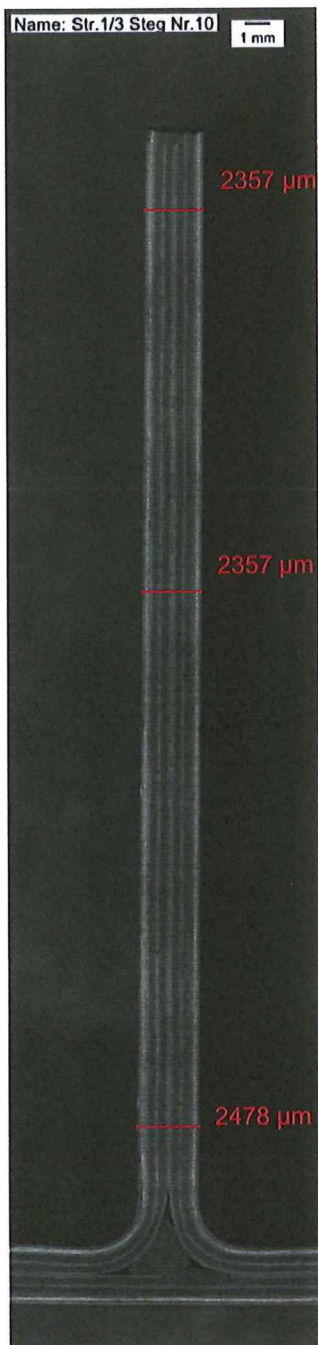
Cross section of panel 6 stringer 2b skin
